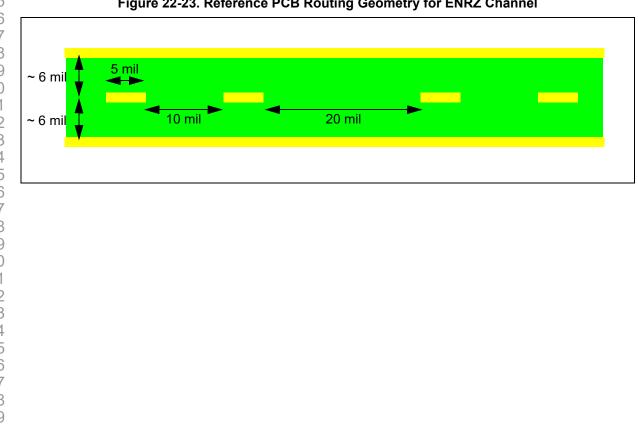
Reference PCB Routing Geometry for ENRZ Channel
